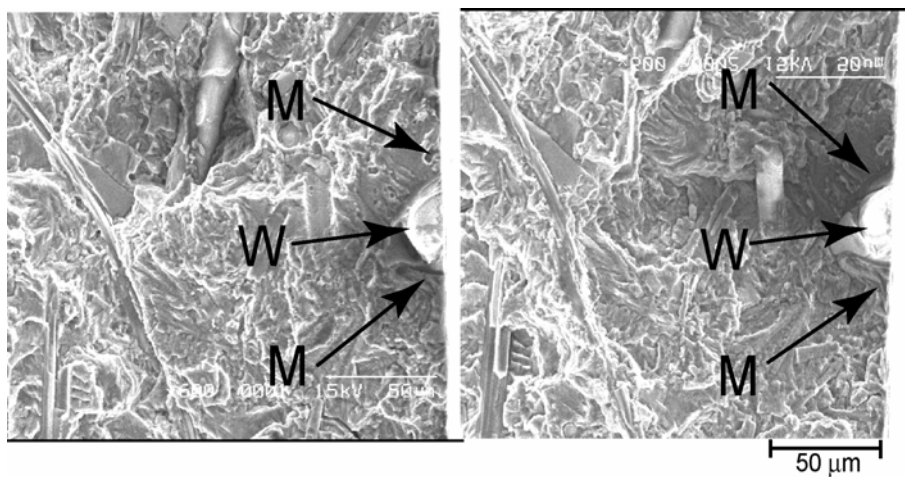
Matching fracture surface after fatigue fracture, maximum
